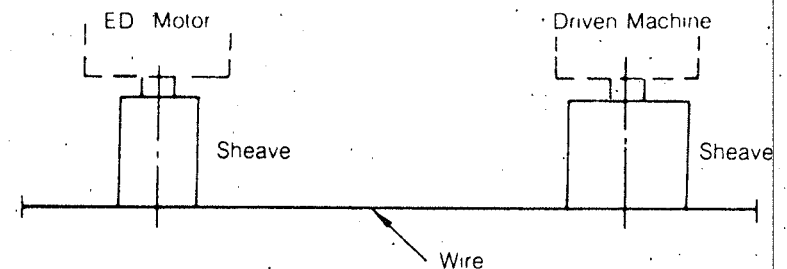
Checking Alignment Between Driven Machine Sheave and ED Motor Sheave
